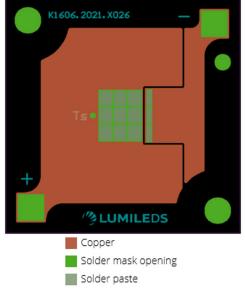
An example of a LUXEON 7070 gerber drawing.
